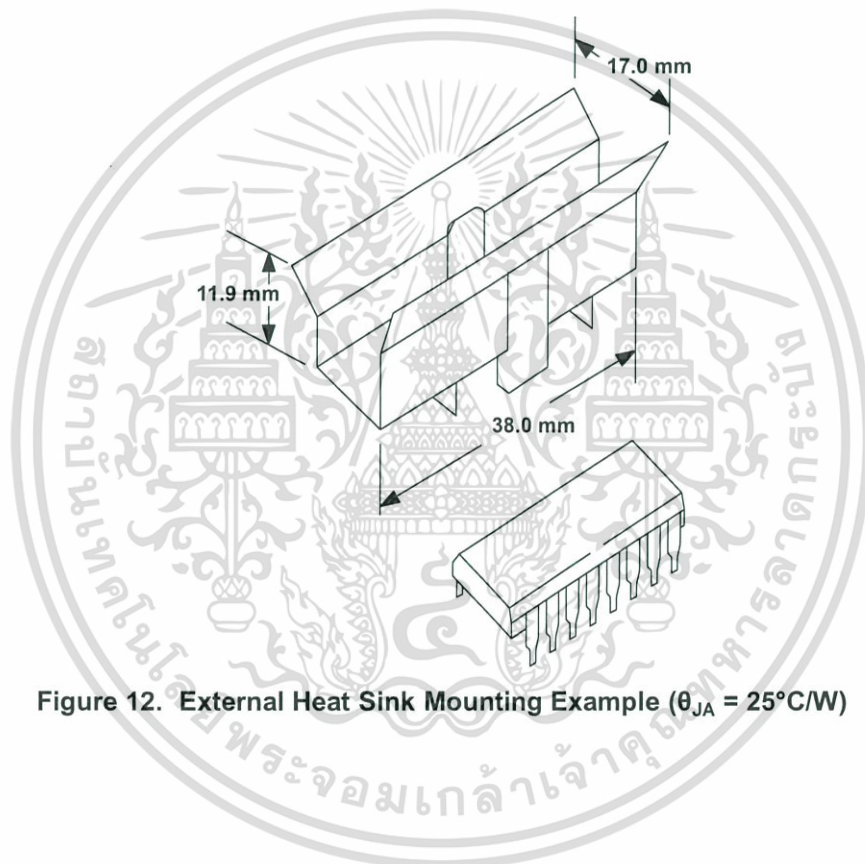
External Heat Sink Mounting Example ($\theta_{JA} = 25^\circ\text{C/W}$)
